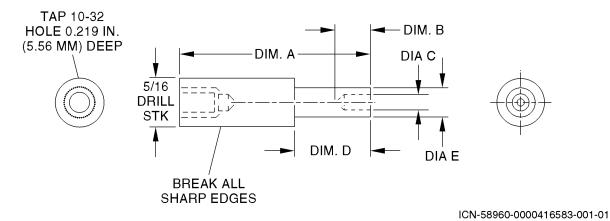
Contact Seating Inspection Kit Contact Adapter, T3009406-12
